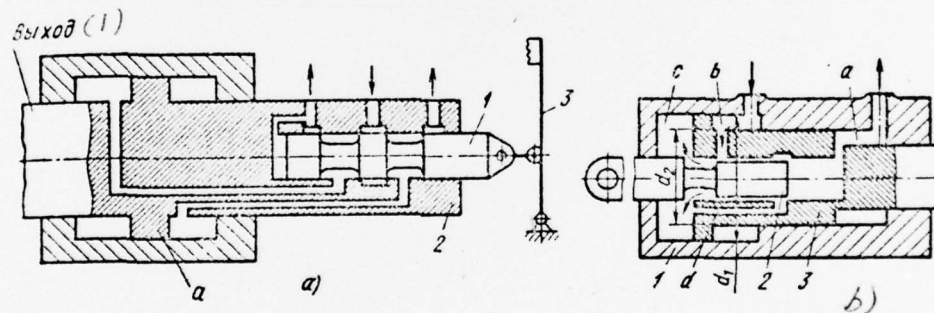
Hydraulic boosters with the valves, arrange/located in the piston of actuating cylinder.
